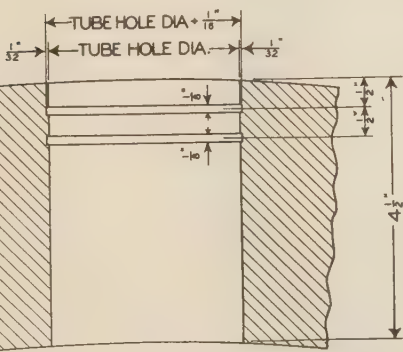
TYPICAL TUBE SEAT THE FULL THICKNESS OF PLATE, FOR USE WITH RETRACTIVE-TYPE EXPANDER
